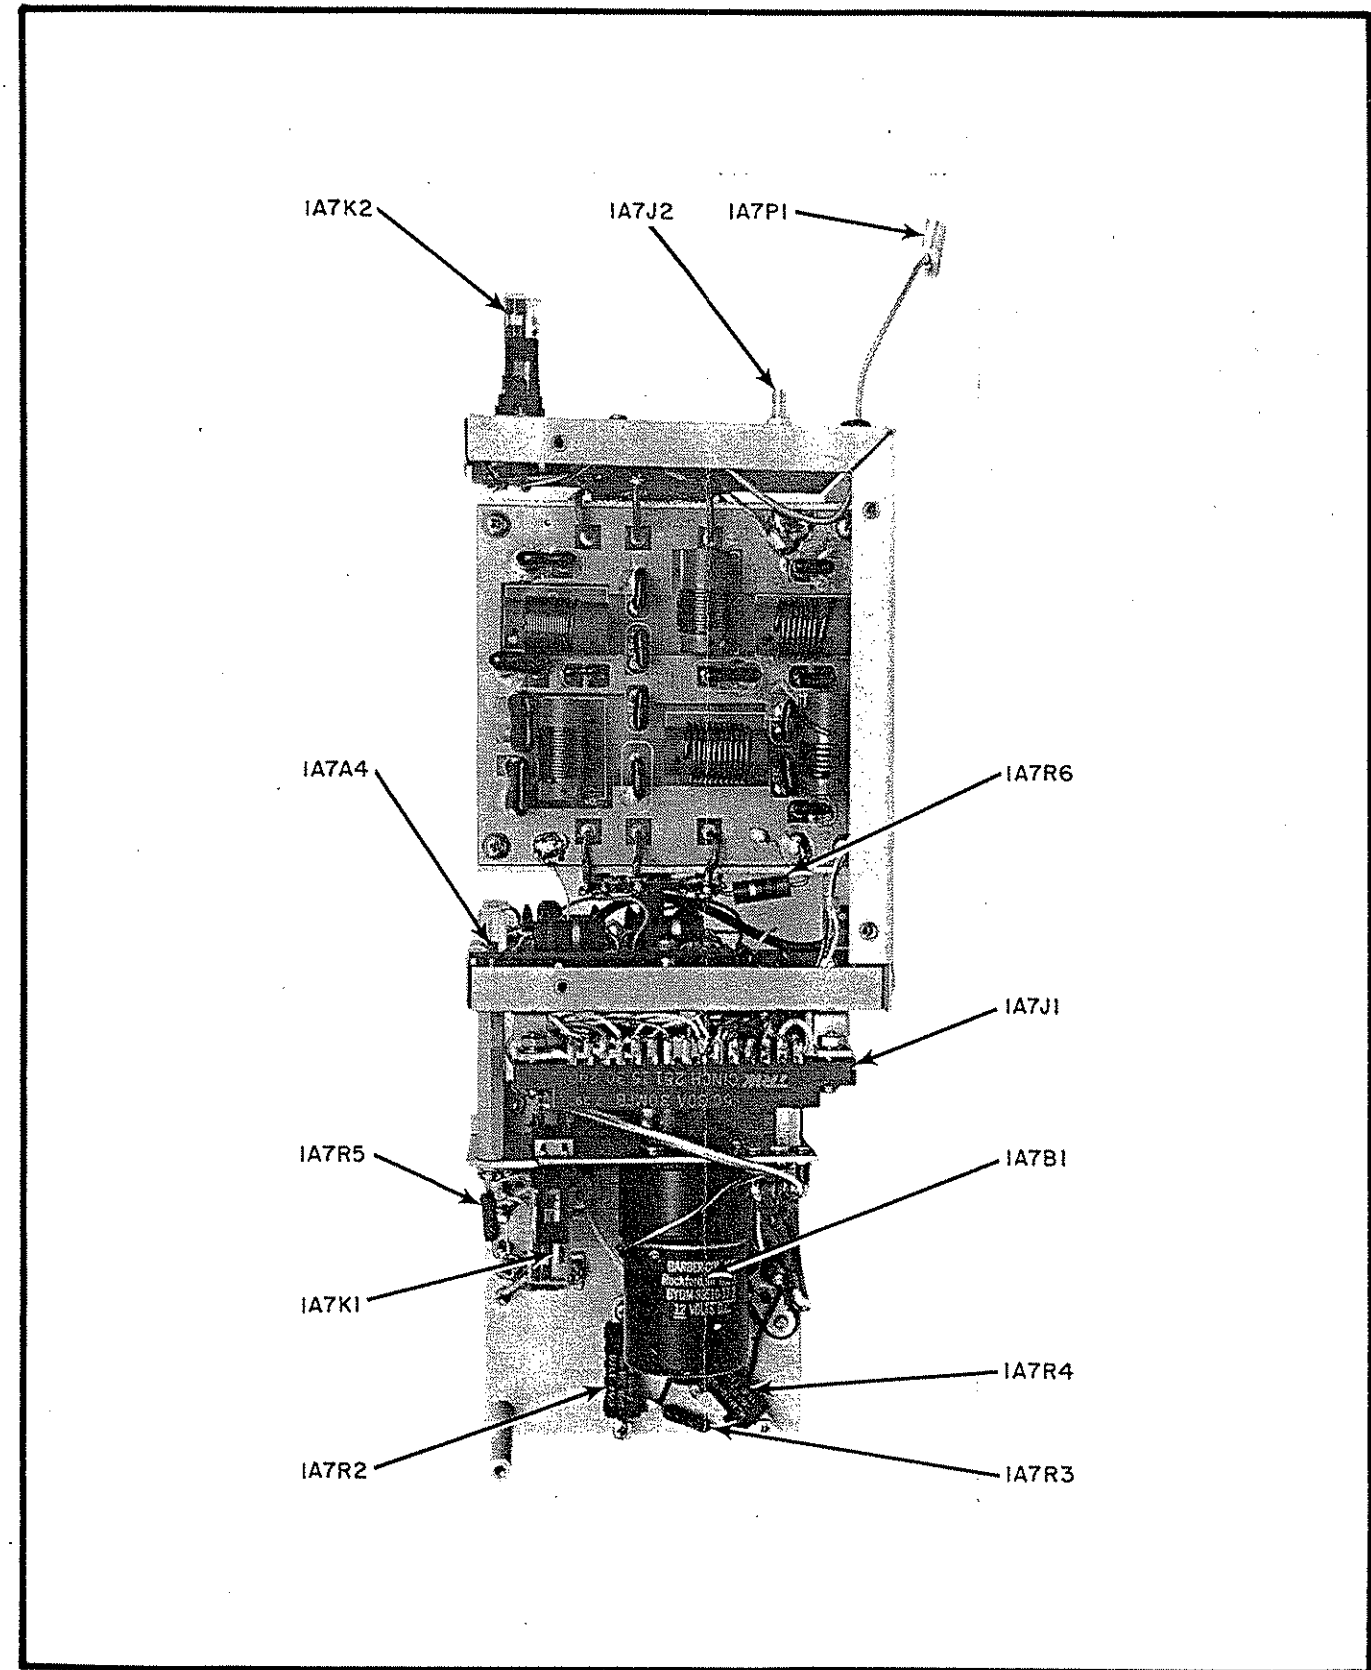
Filter Module Right Side View with Interface Board Removed
